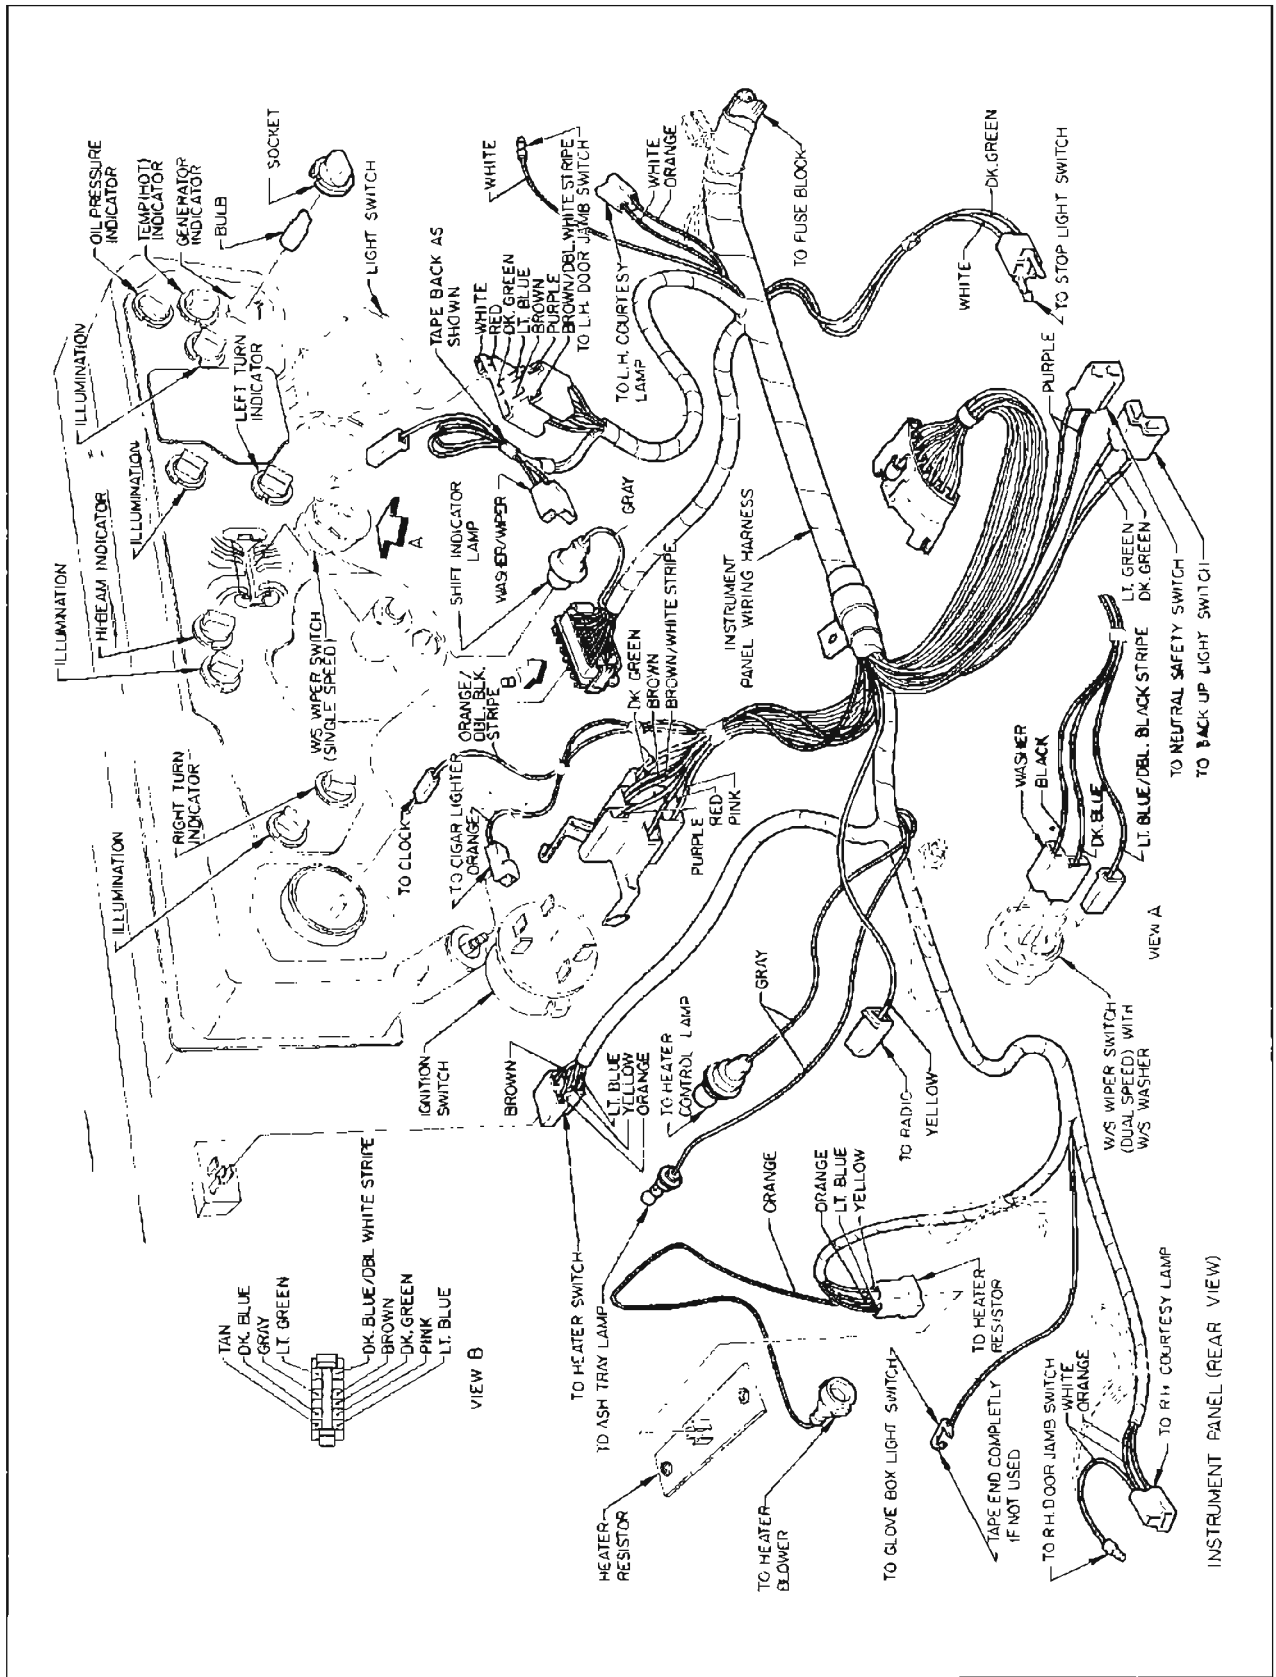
Instrument Panel Wiring Harness - View from Forward Side
